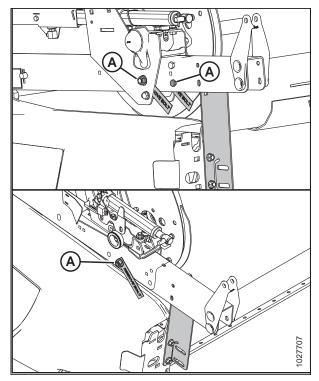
Reel Right Arm Top Image - Single Reel Bottom Image - Double Reel
